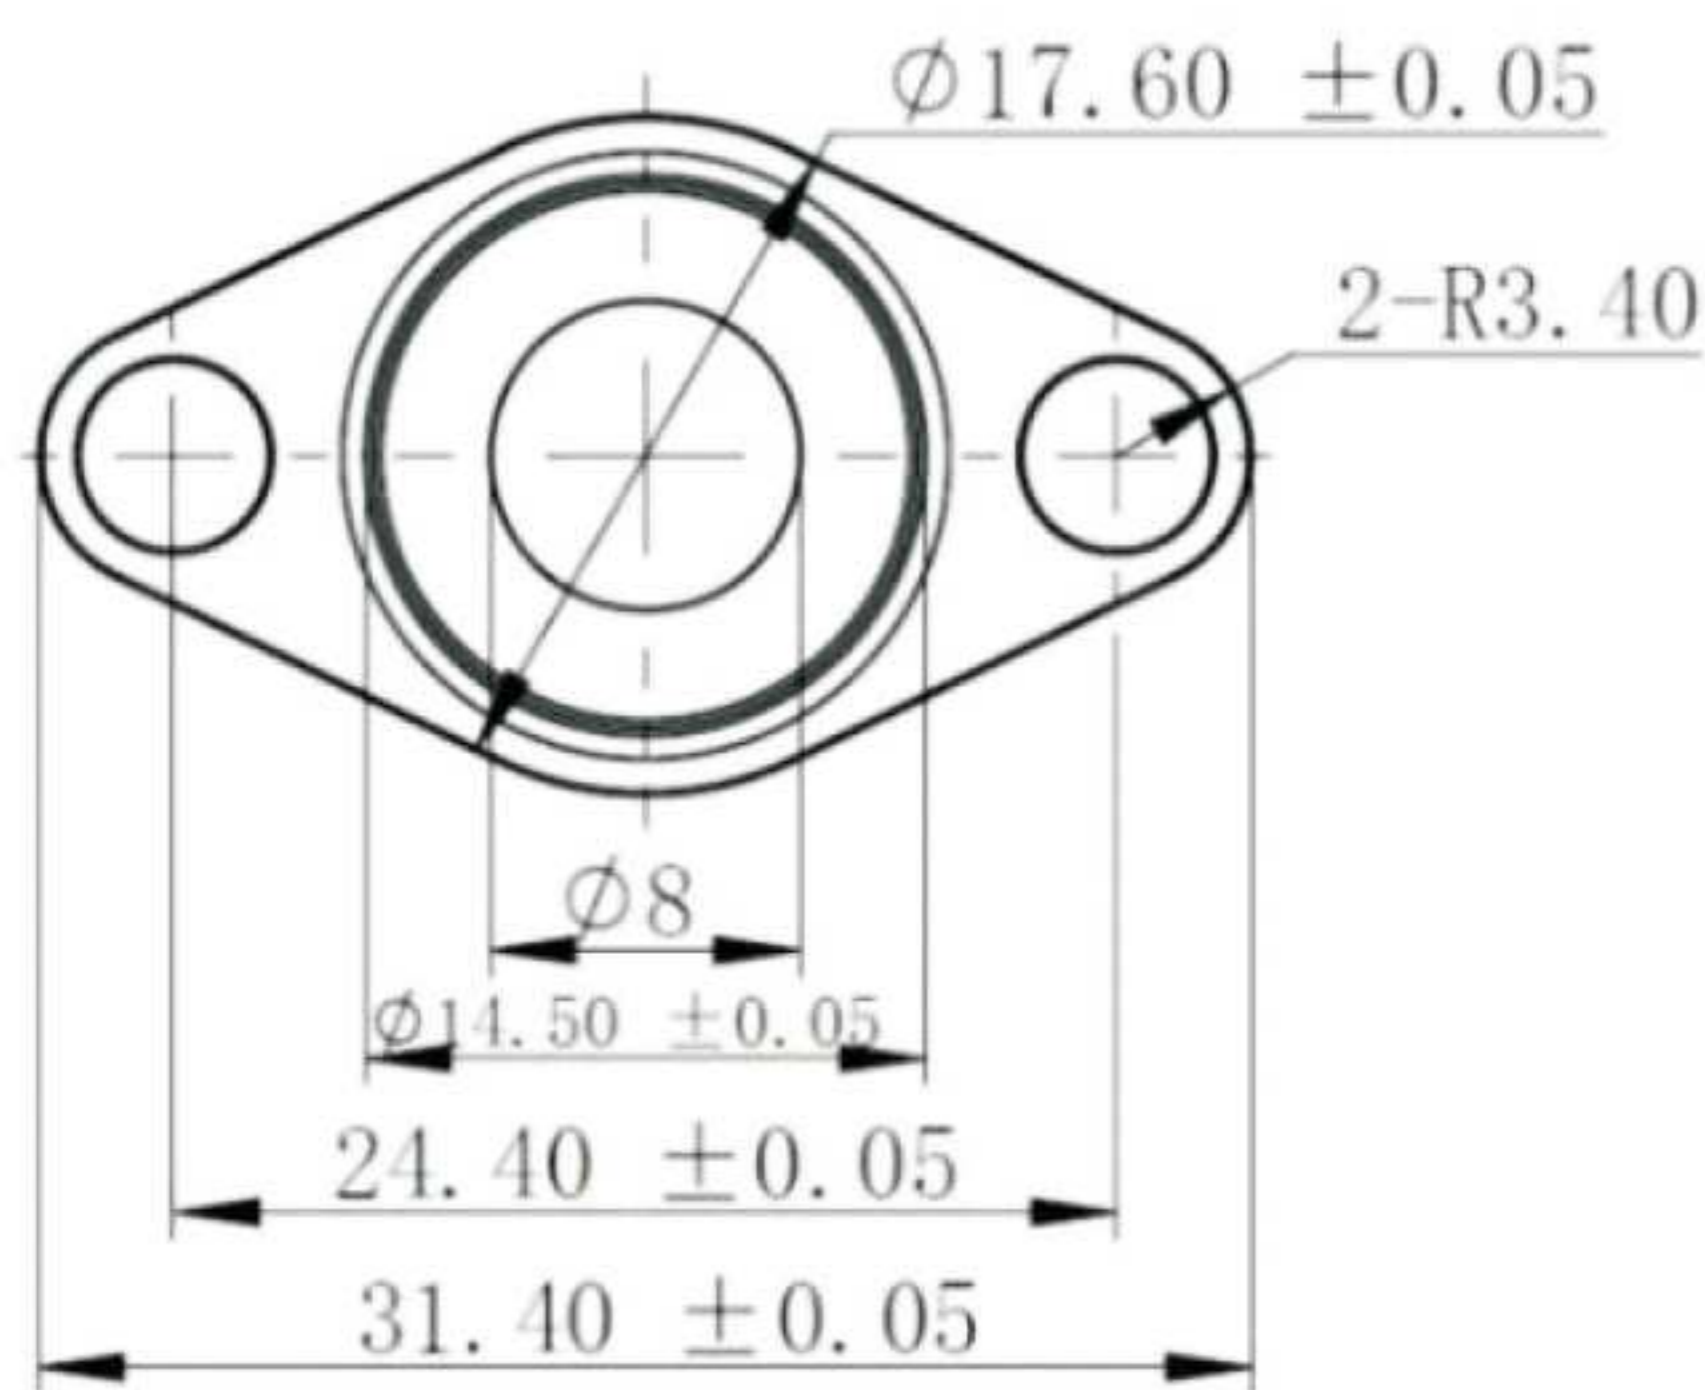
mechanical dimension 1 (Unmarked tolerance $\pm 0.1\text{mm}$)
